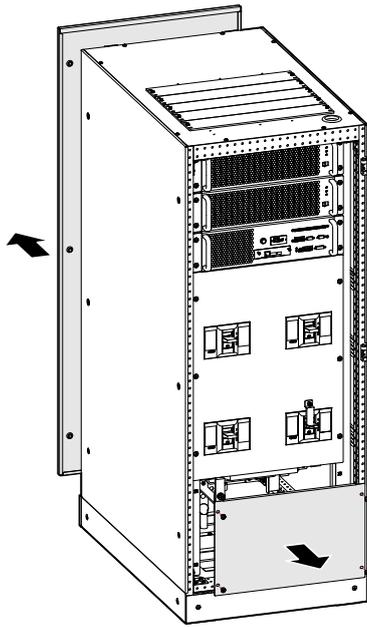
Remove the back and top wiring cover plate of 160K, 200K
